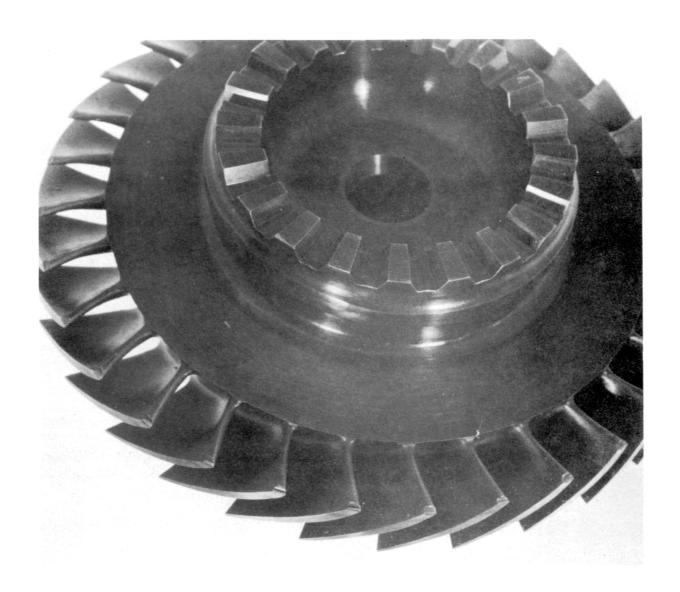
NASA 6:1 Compressor Test Rig, Inducer Failure, NASA Turbine Wheel Rub.
